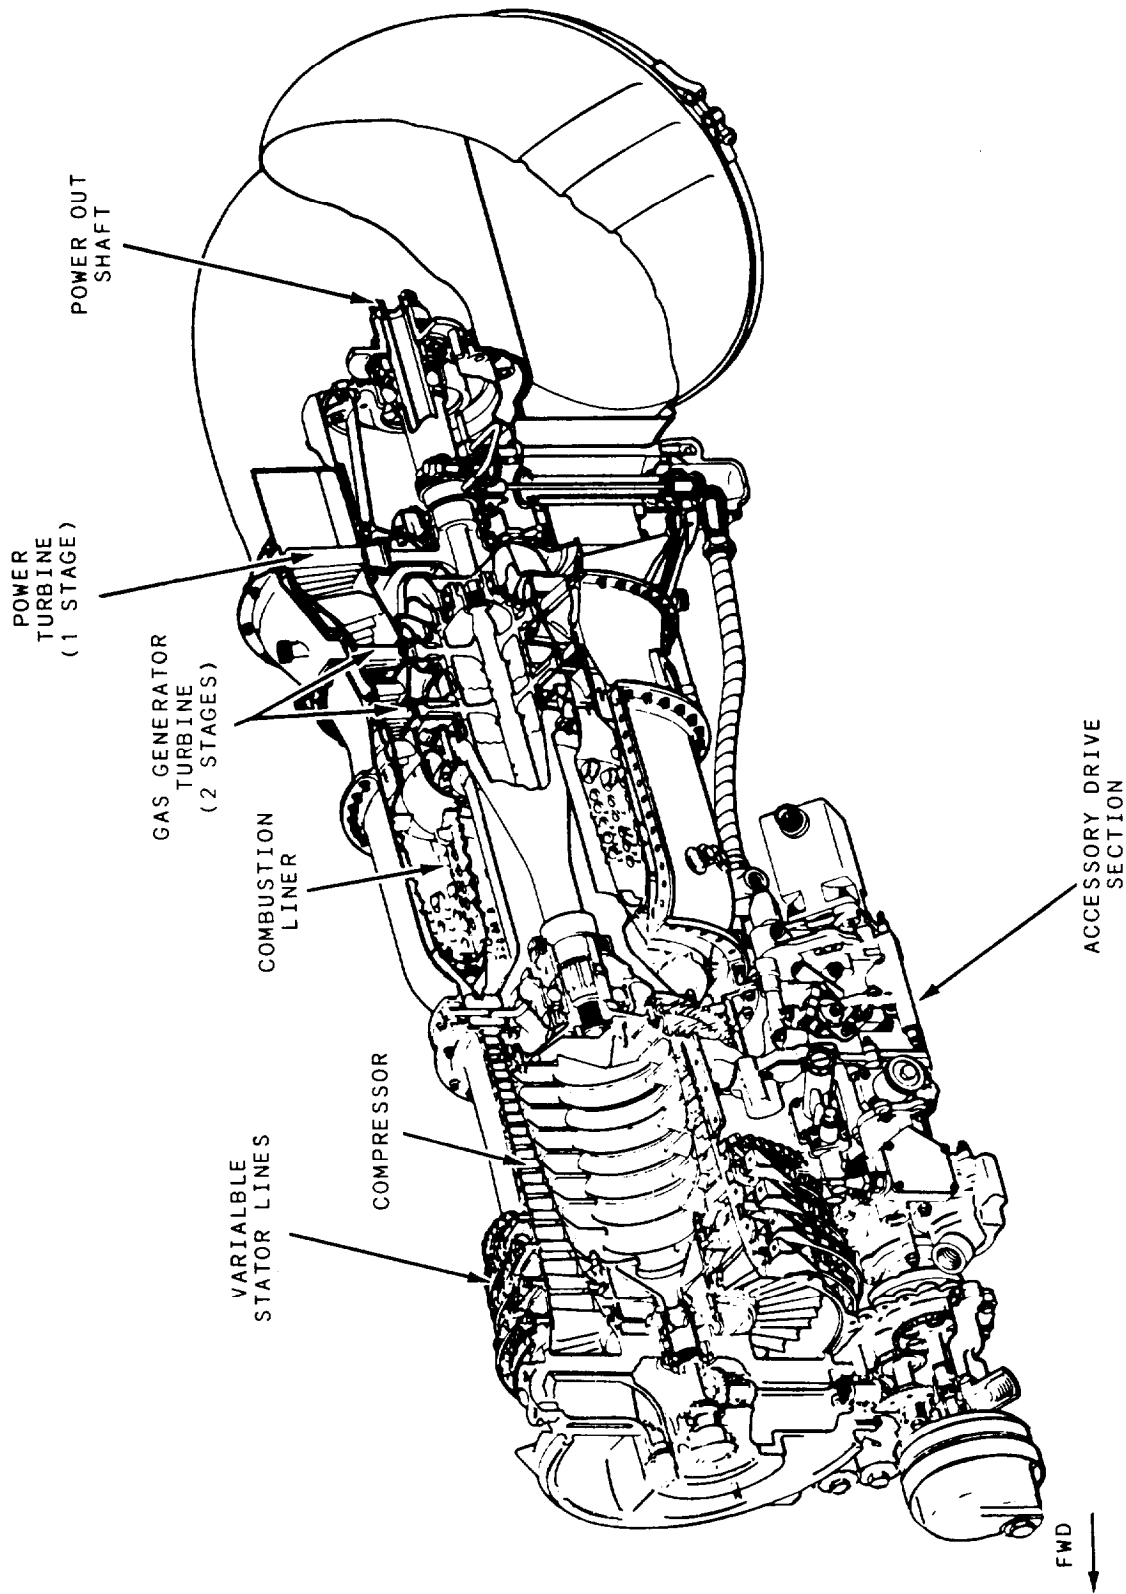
T58-GE-10 turboshaft gas turbine engine (cutaway view).
